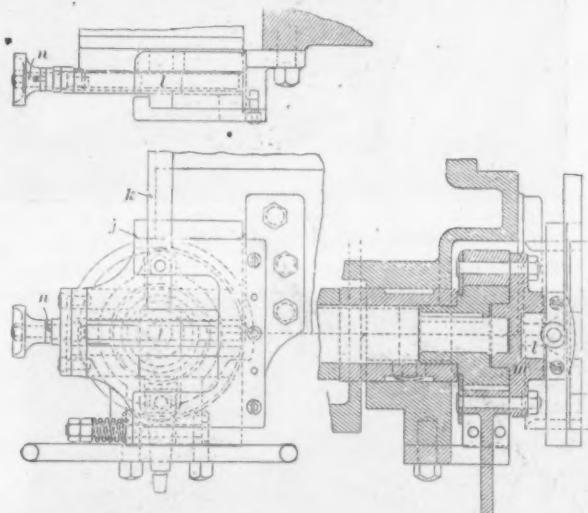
Detail of the Releasing Friction for the Feed Mechanism.
